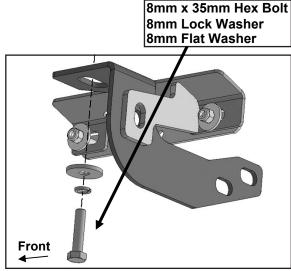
Insert Double Bolt Plate through the (2) holes in the pinch weld. Attach passenger/right Front Support Bracket to back of pinch weld.
